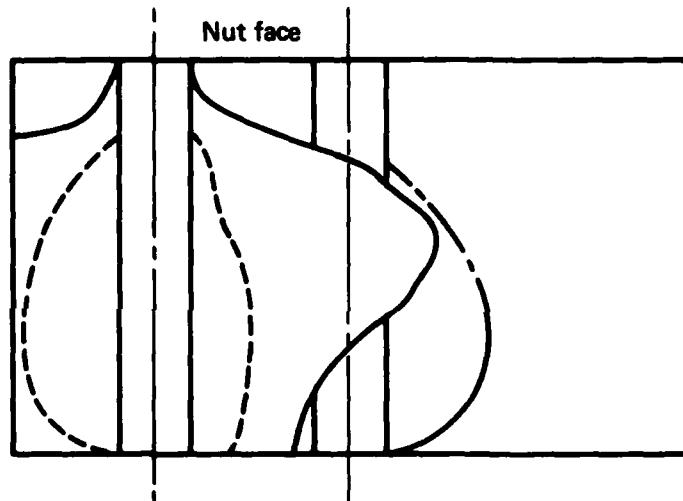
(a) FRACTURE SURFACES: SPECIMEN TYPE (A)
